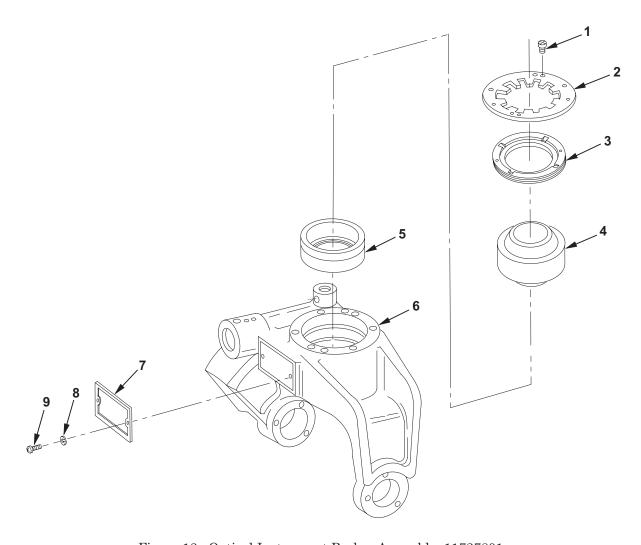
Optical Instrument Rocker Assembly, 11727801.
